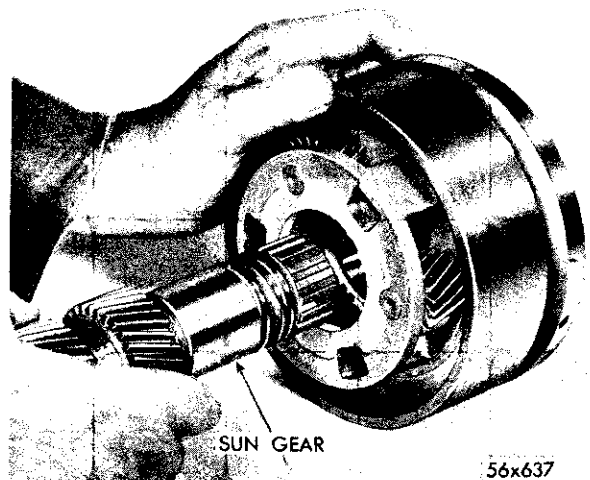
Removal and Installation of Sun Gear (Reverse Planet Pinion Carrier and Overrunning Clutch Assembly)
